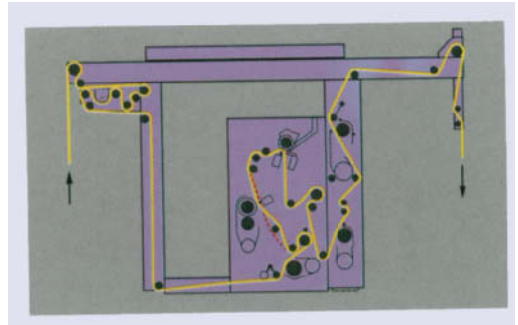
Tigering machine OPTICUT GTS by Gematex.
